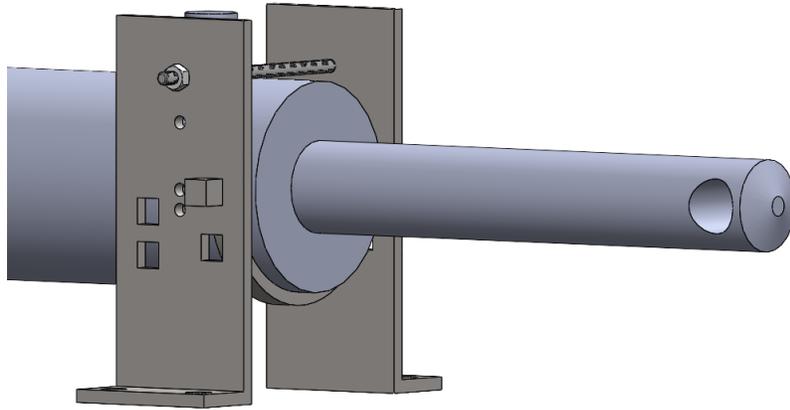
Rod End Bracket Attached with Configuration 4 Cylinder's Rod End Side
